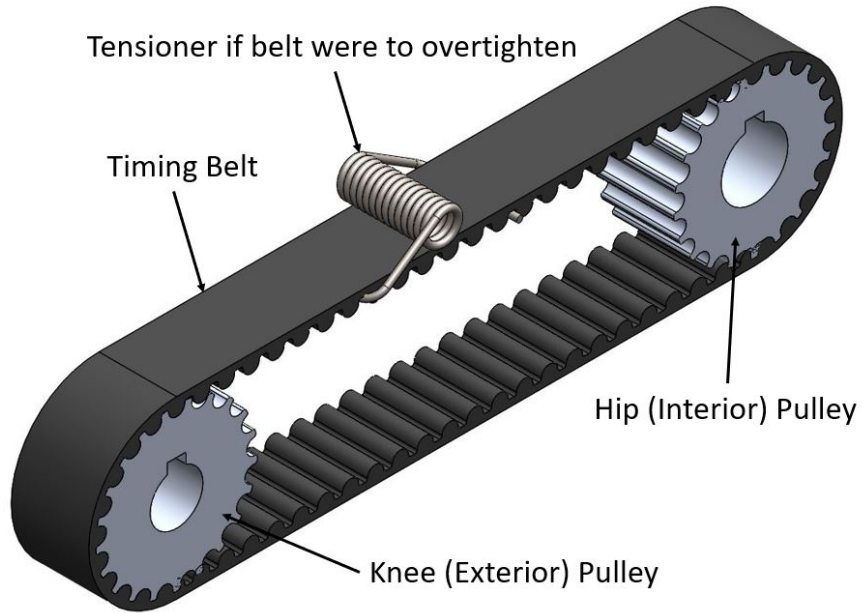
Isometric view of belt and pulleys with a tensioner on the belt’s tight side
